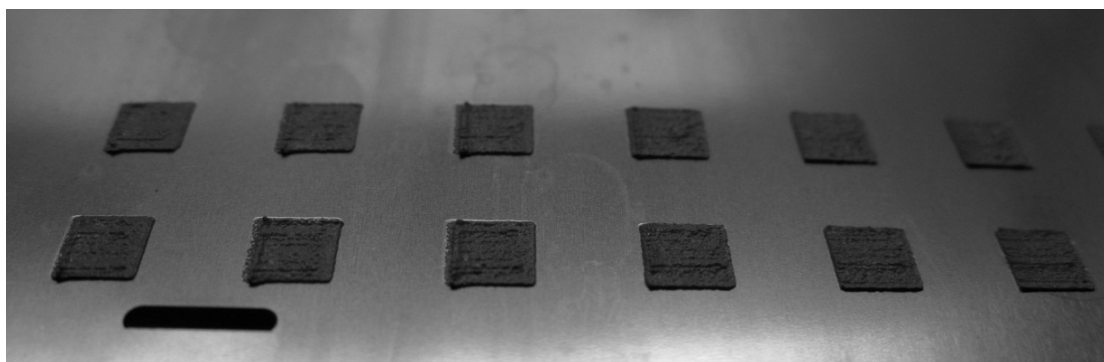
Result from manual screenprinting of solder paste on bottom side of stencil.
